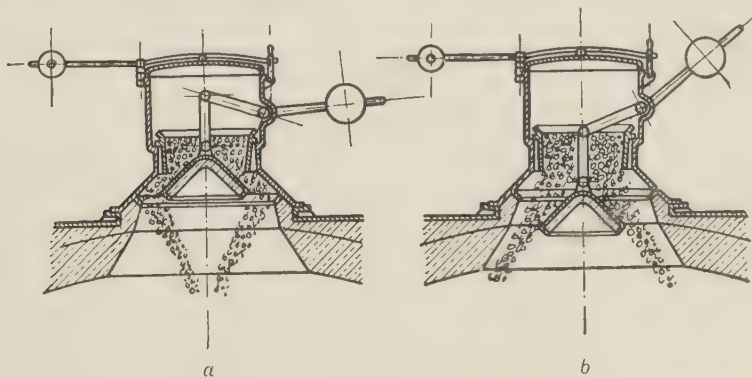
The Hilger Producer. Details of Feed Hopper.
